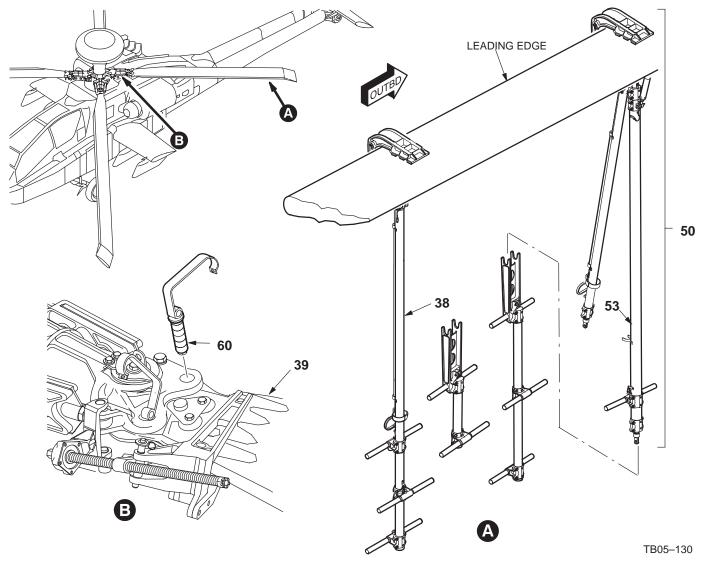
Removal of Aircraft Blade Pin from L/H AFT Blade Edge
